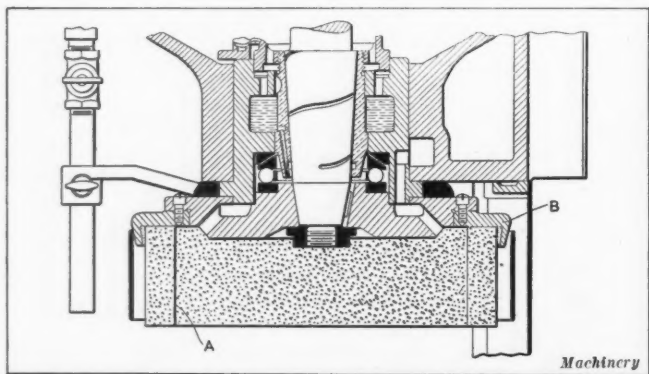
Section showing how Cylinder Wheel of Blanchard Vertical Surface Grinder is held and mounted
